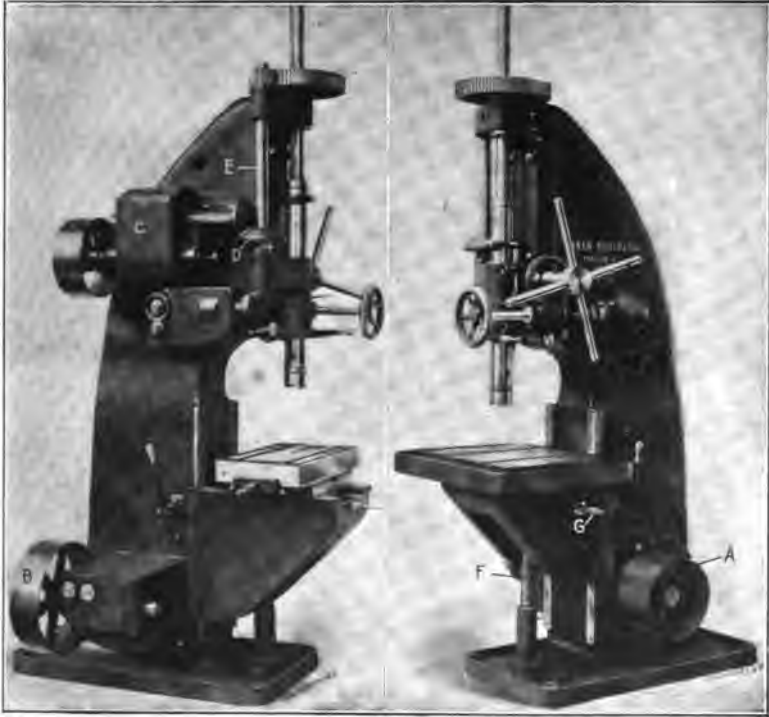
Baker Bros. High-duty Type of Drilling Machine
